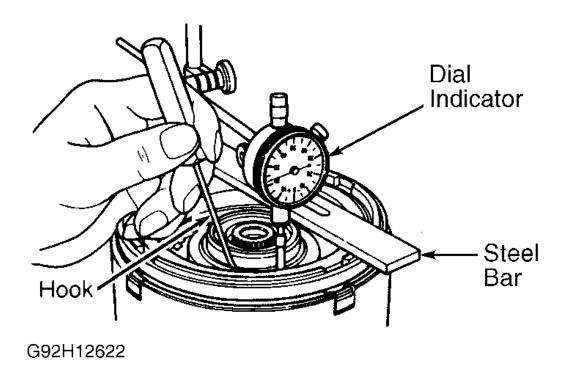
Checking Reverse Clutch Clearance Courtesy of CHRYSLER CORP.
